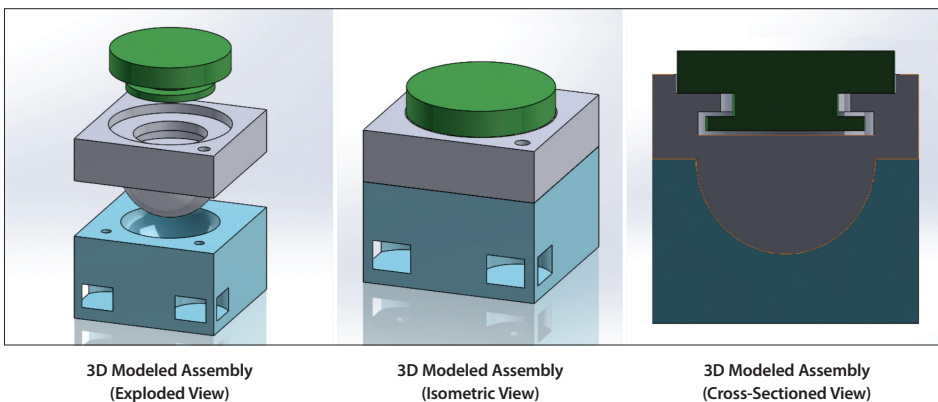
3D modeled assembly views generated using 3D CAD software.
